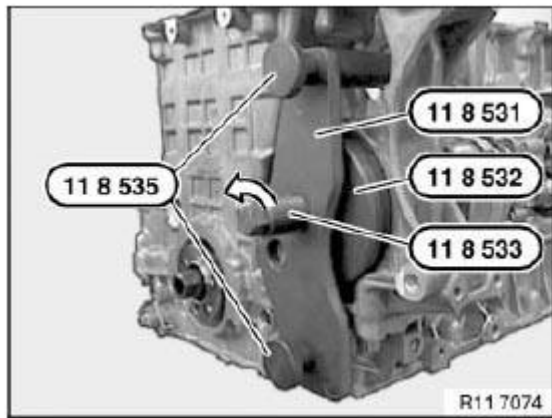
Identifying Special Tools 11 8 535, 11 8 531 And 11 8 537
